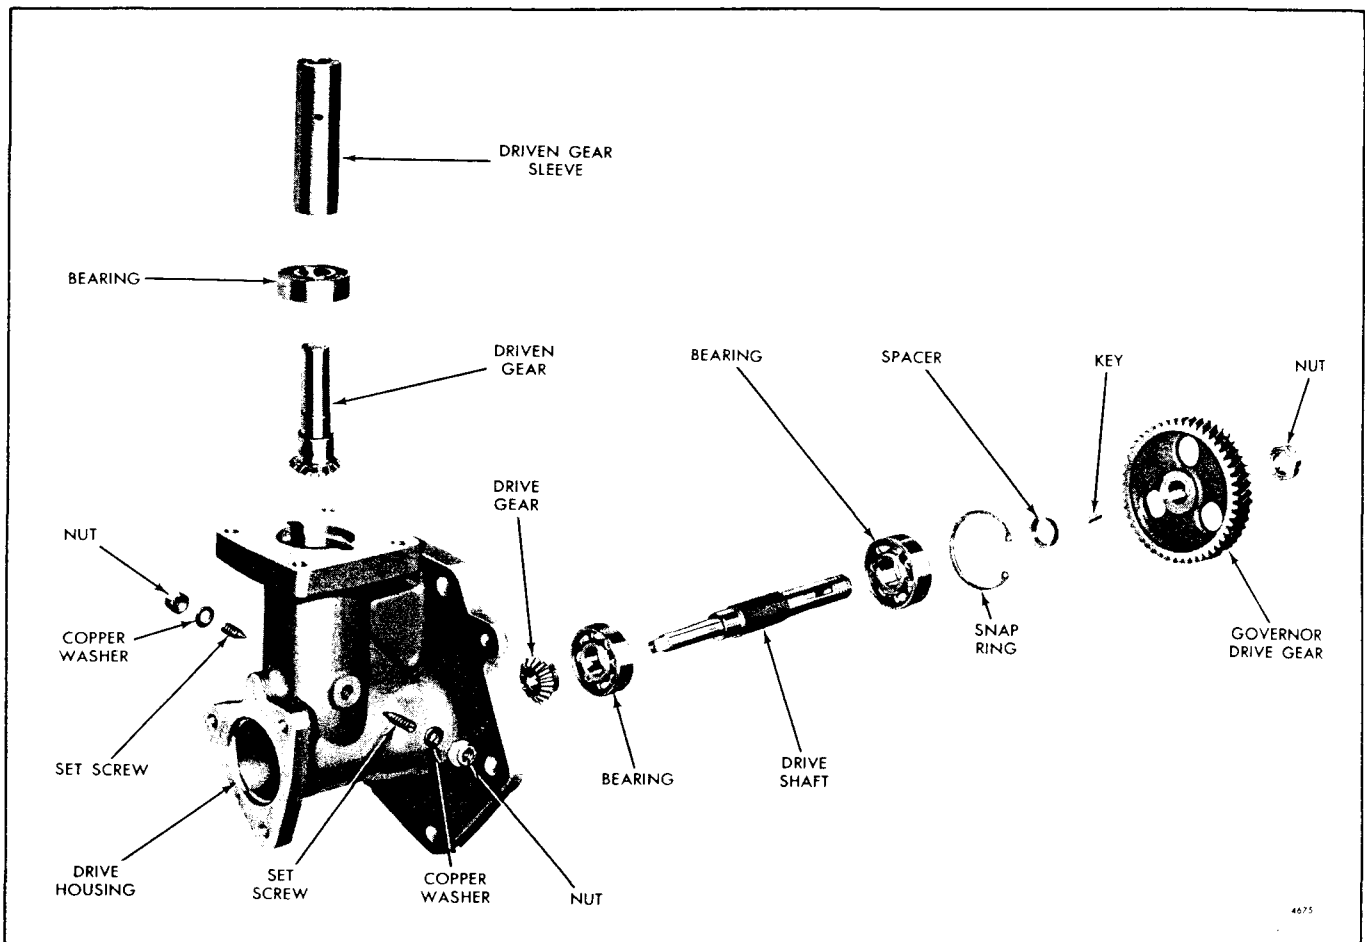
Hydraulic Governor Drive Details and Relative Location of Parts
